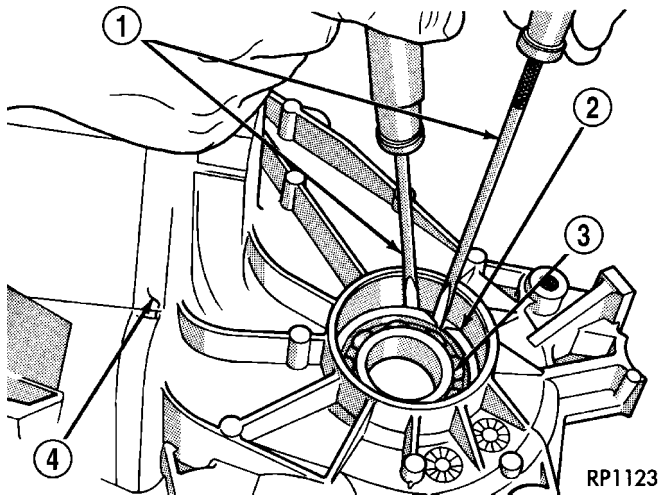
Front Output Shaft Bearing Retaining Ring Removal
